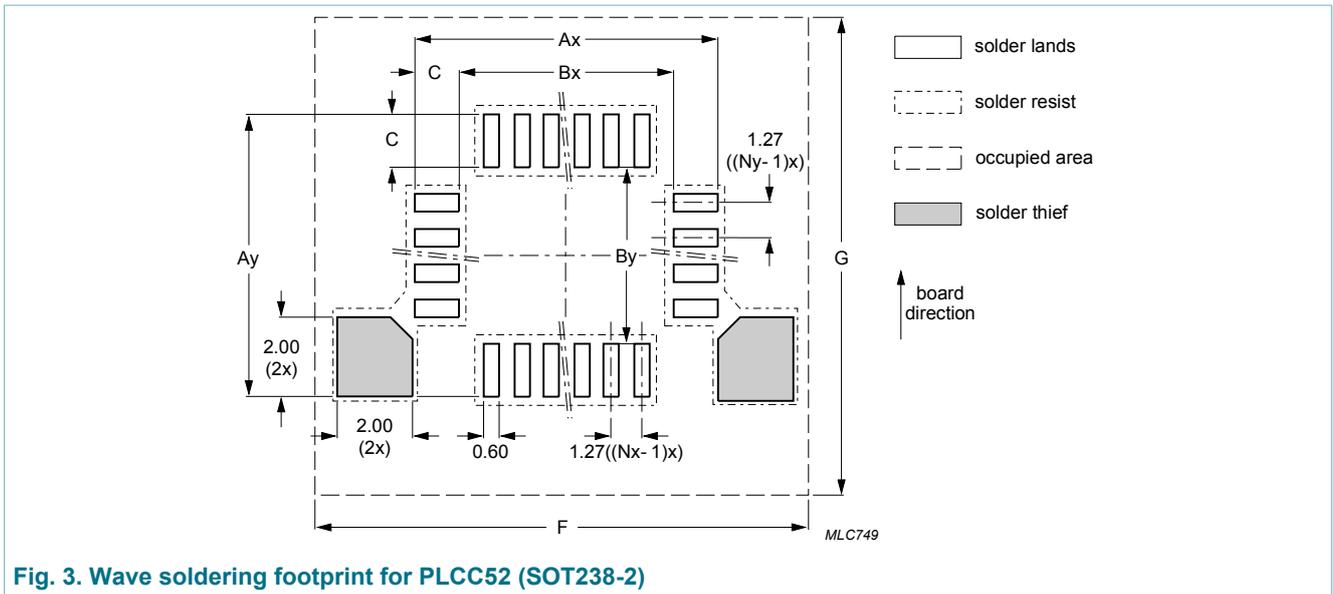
Wave soldering footprint for PLCC52 (SOT238-2)
